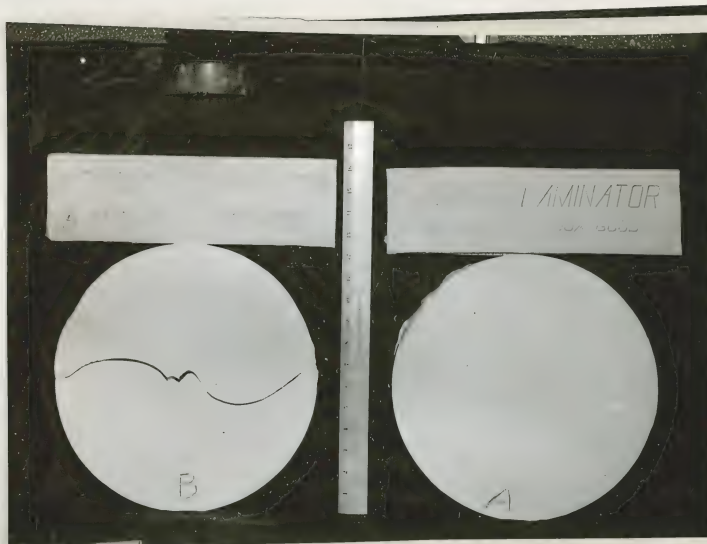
Left Sample from Regular Pug Mill Blank. Right Special Mixing ("Delaminator") Attached to Pug Mill.
